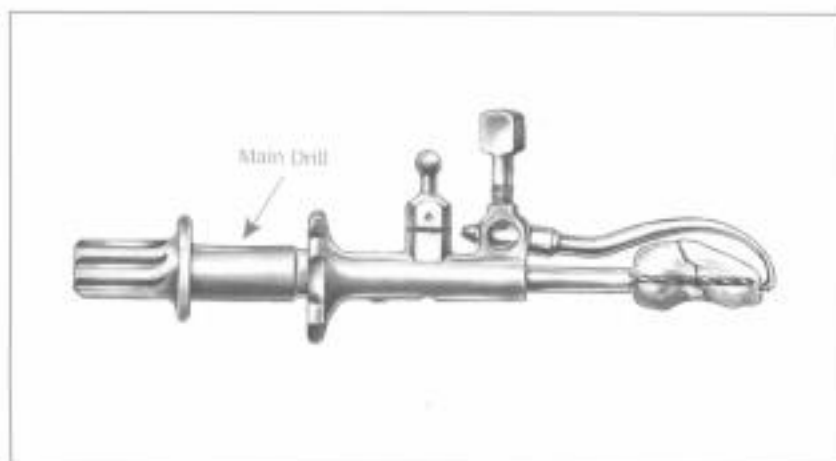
Drill the main hole for the leading threads, and the shaft of the bone screw
